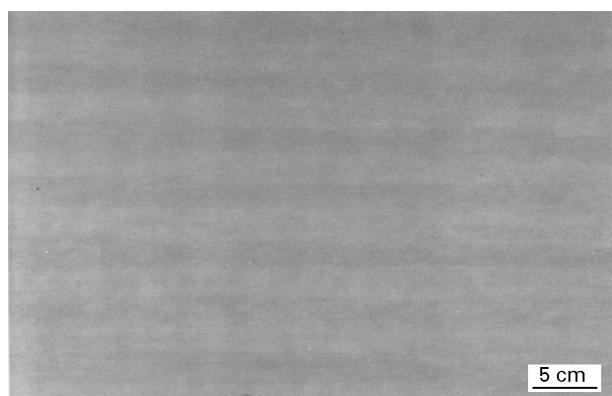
Macro-photograph of surface striations on the surface of galvanized steel sheet.
